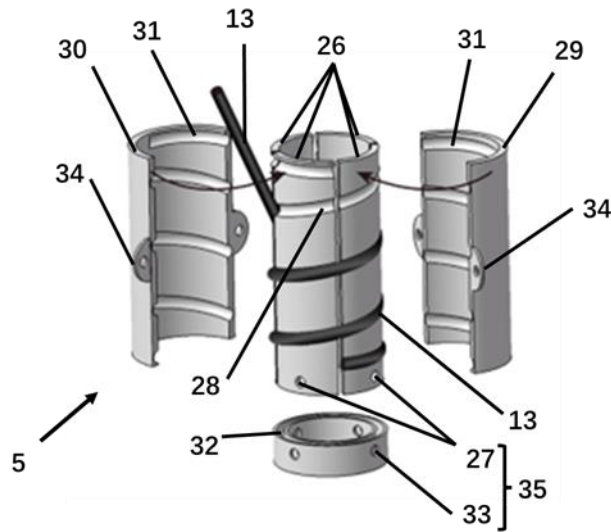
The diagram schematic of designed winding mold of CHSs
